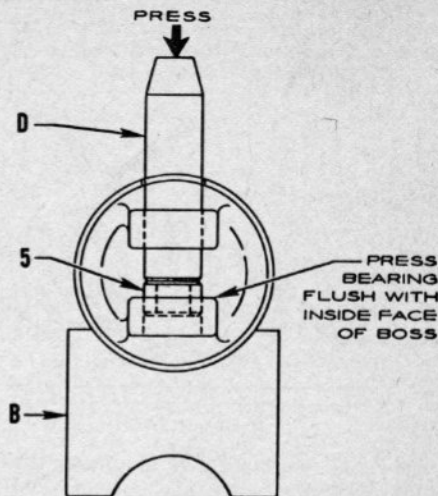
Use driver (D) and support block (B) to install piston pin needle bearings. After bearings are installed, a similar driver can be used to install piston pin.
